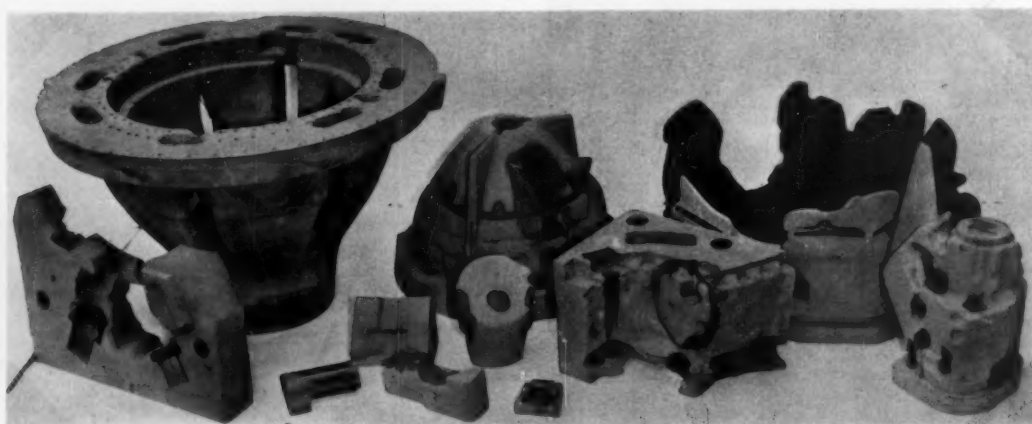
Some of the 43 cores for casting shown in Fig. 20.
